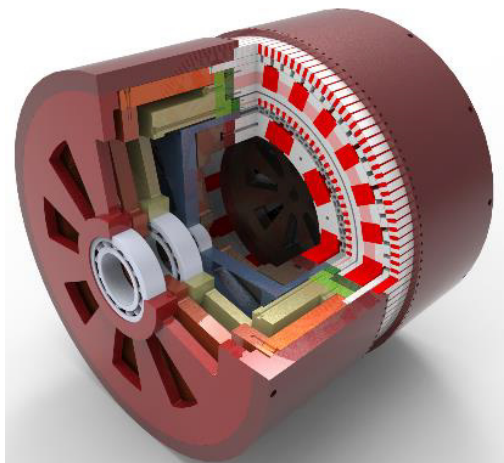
Mechanical design for the nested MSMG [figure from Sina Modaresahmadi].
